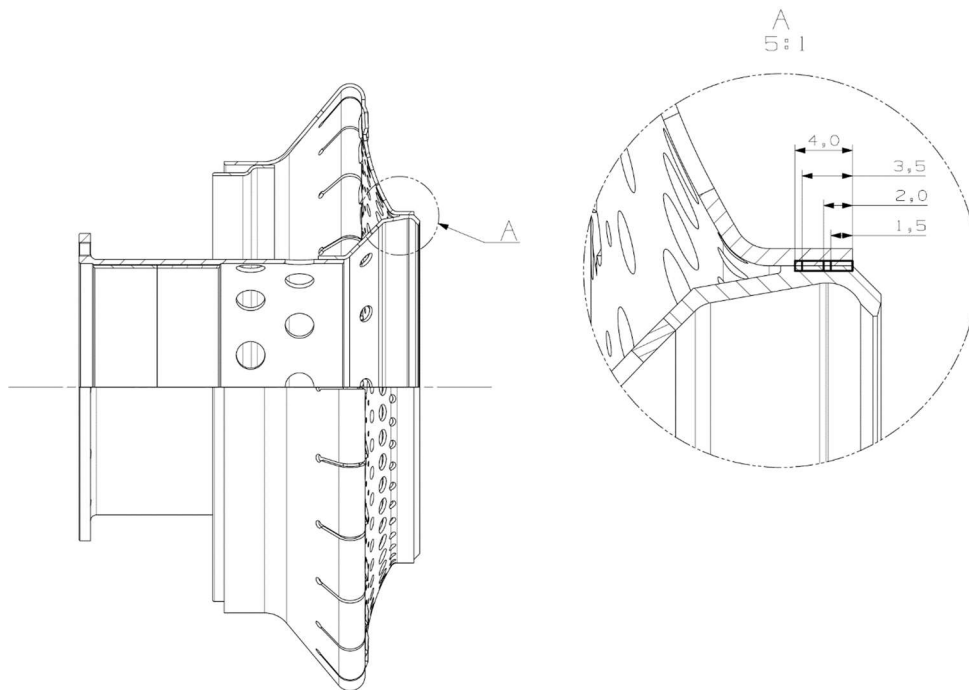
Current Inner Liner geometry with the weld penetration extremes
